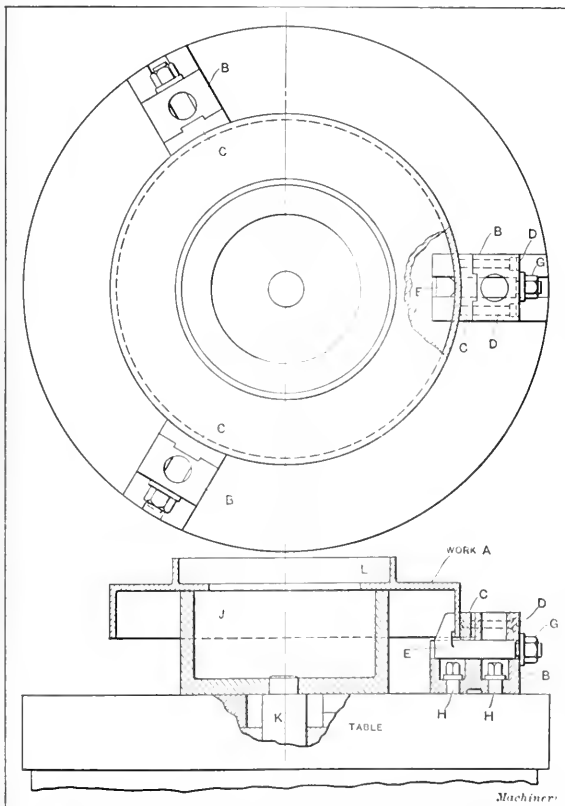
Arrangement used for holding Thin Work on the Boring Mill
